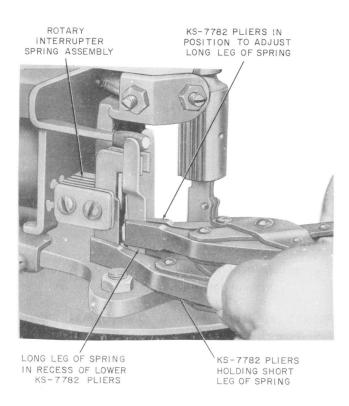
Method of Adjusting U-Shaped Springs on Rotary Interrupter Spring Assembly
